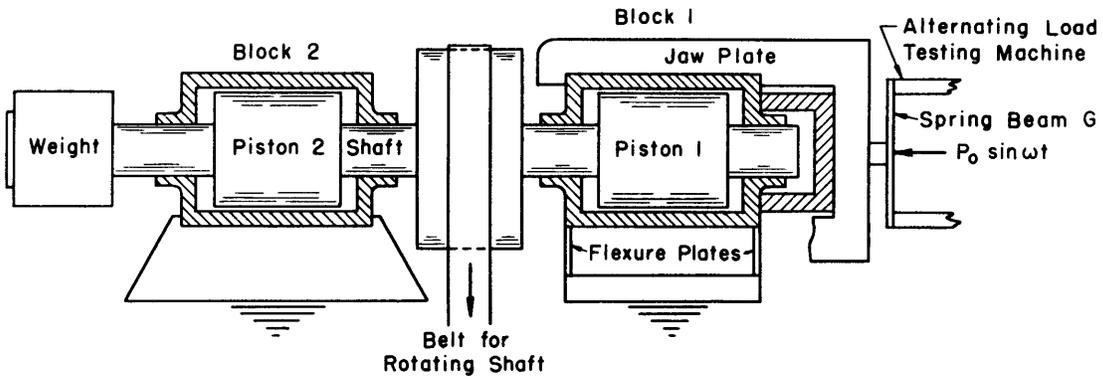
Diagram of Parts Composing Test Assembly of 0.3-Scale Model of Shaft-Restraining Block
